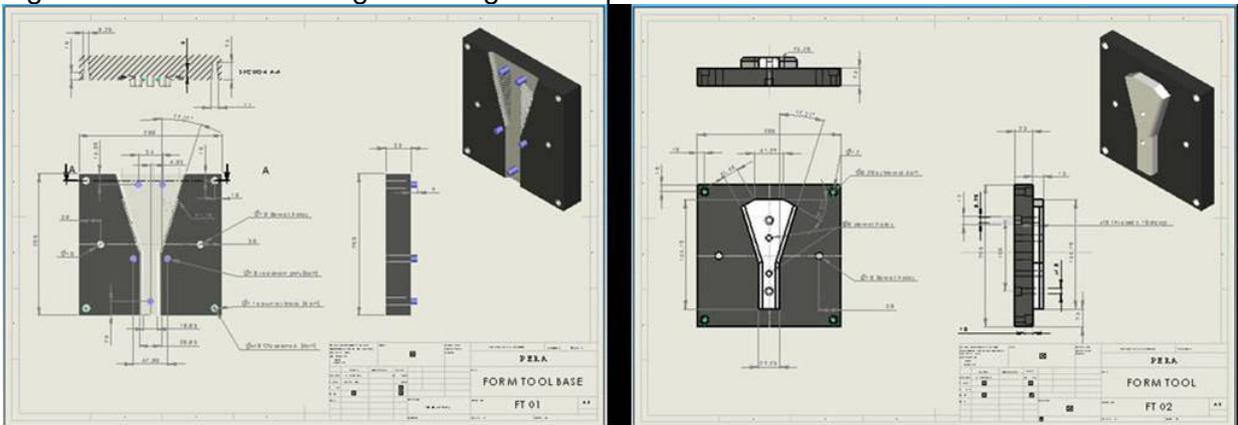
CAD drawings of the form punch and die for the formation of the roll on the edge of the rasp blank.
